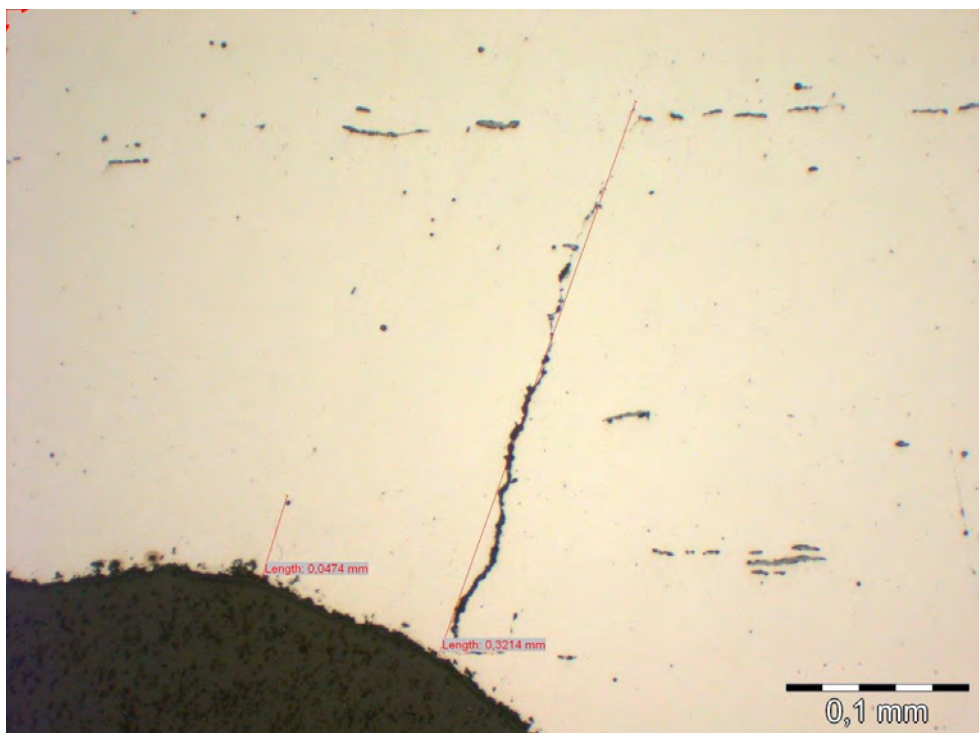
Cut five in crack at segment B, second ridge on barrel no. SFK 0120-A
